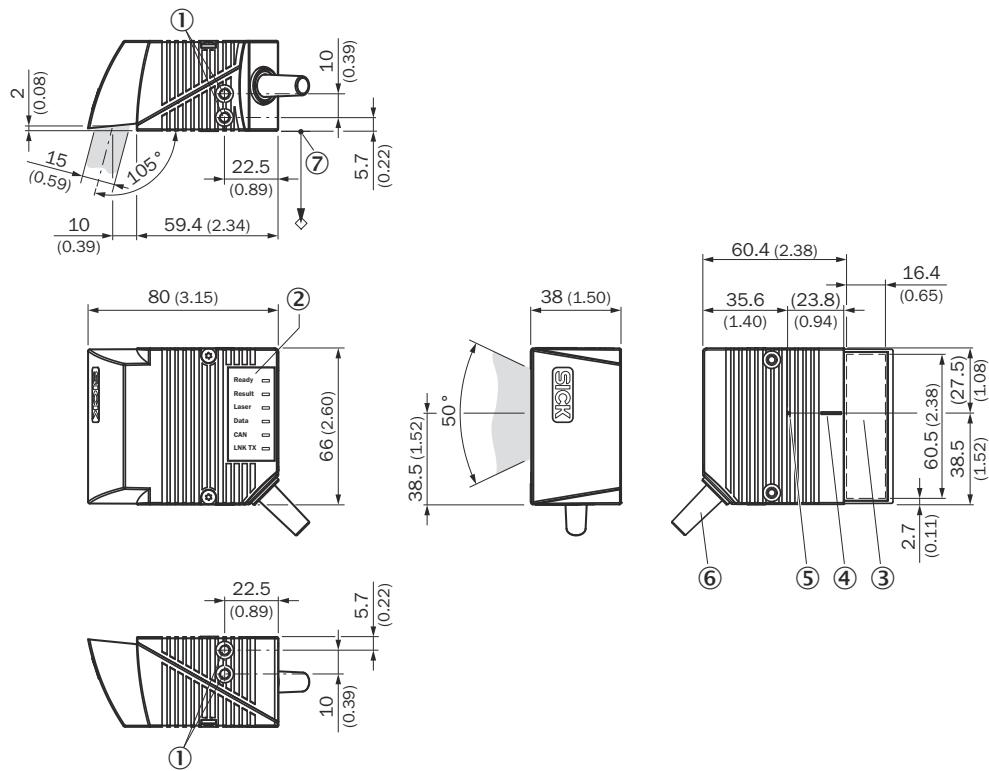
CLV62x in IP65 standard housing with side viewing window and connecting cable: Structure and device dimensions, unit of measurement: mm (inch), decimal separator: Period
